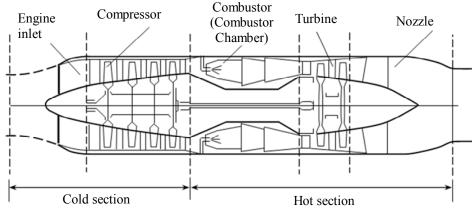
Basic sections and parts of a gas-turbine engine
